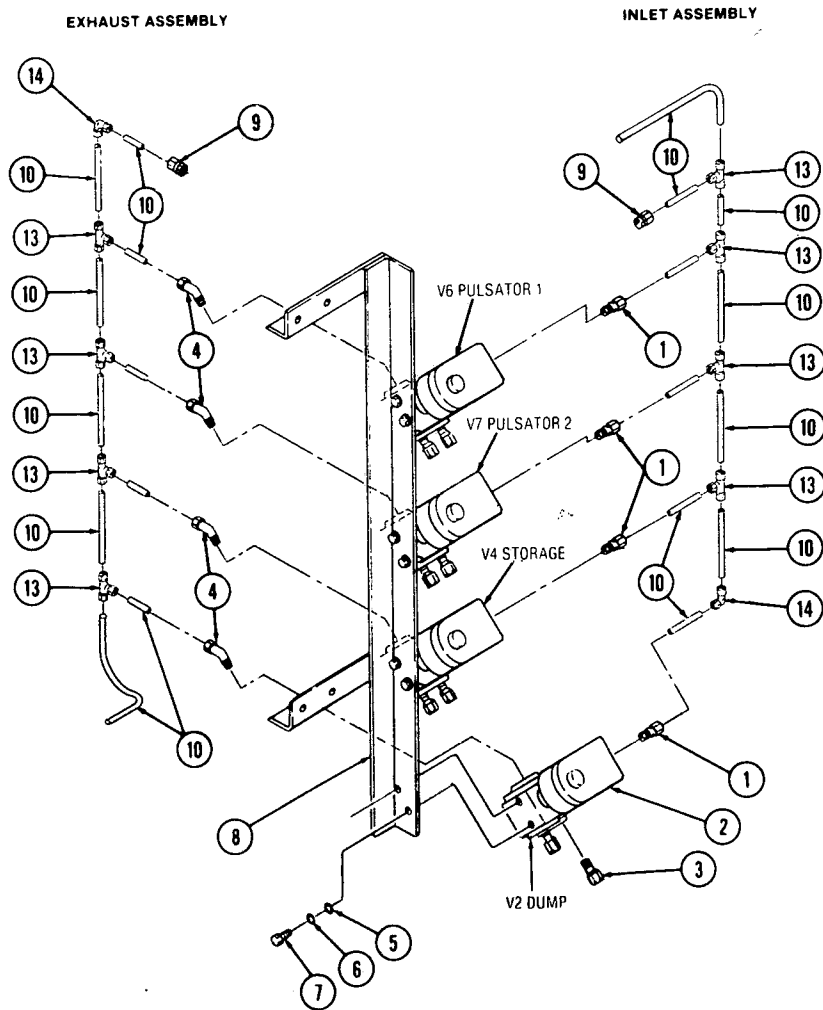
VALVE ACTUATOR ASSEMBLY.
